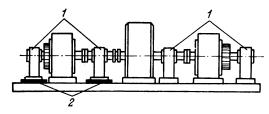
Location of insulating gaskets under the pedestals of motor generator sets with four bearings
